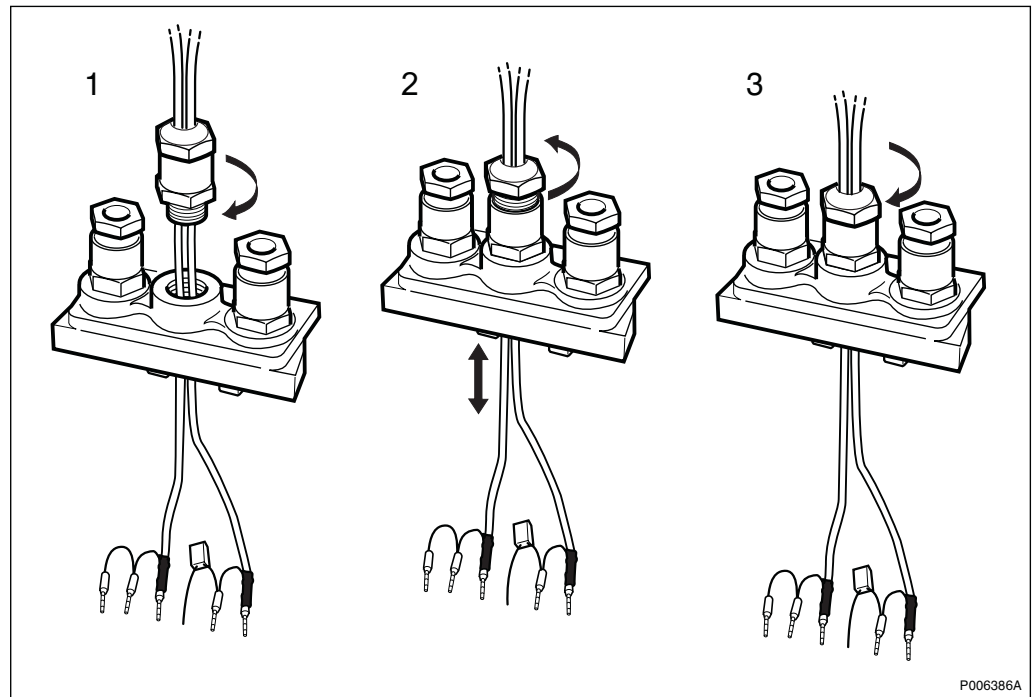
Mounting the cable gland with the optional 75 Ω PCM cable in the gland plate
